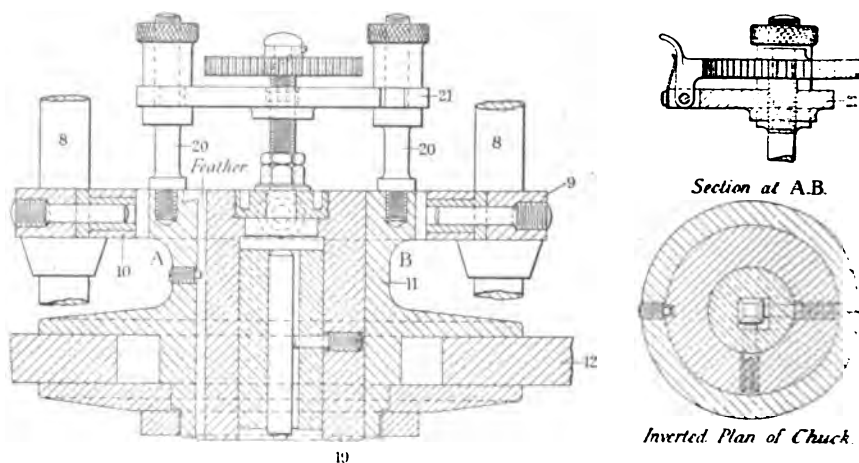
Punch-Cutting Machine (Denton-Waldo).
